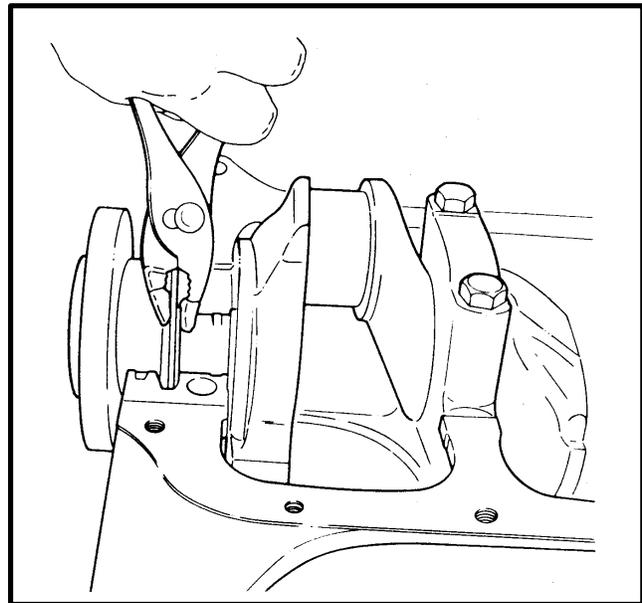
REAR MAIN BEARING REPLACEMENT
